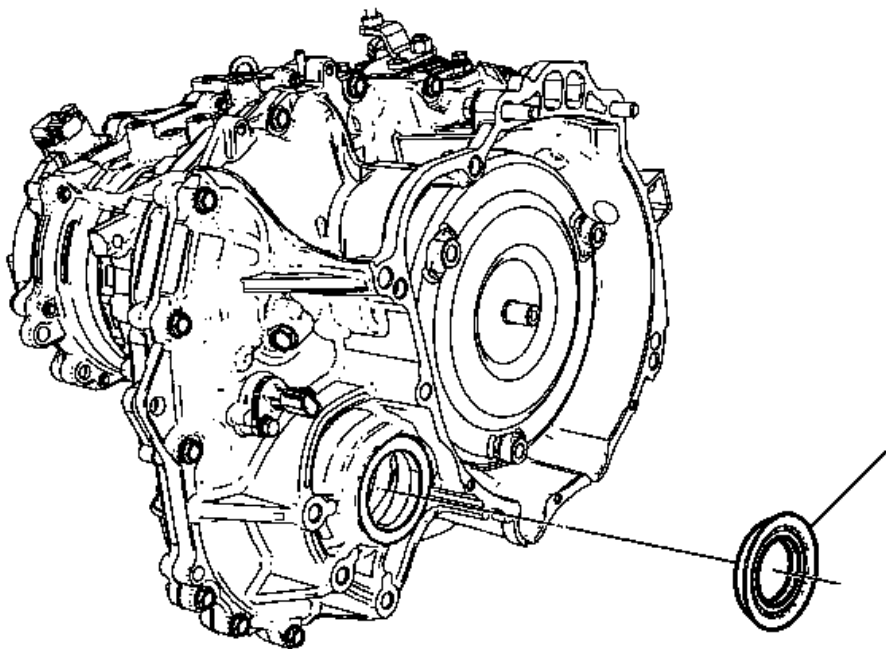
Front Wheel Drive Shaft Seal - Right Side
